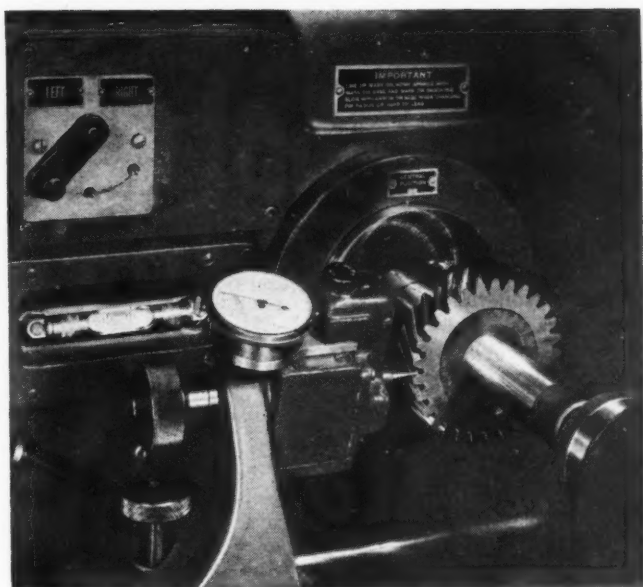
Close-up View of Lead-measuring Instrument Shown in Fig. 1, Set up for Checking Right-hand Helical Gear
